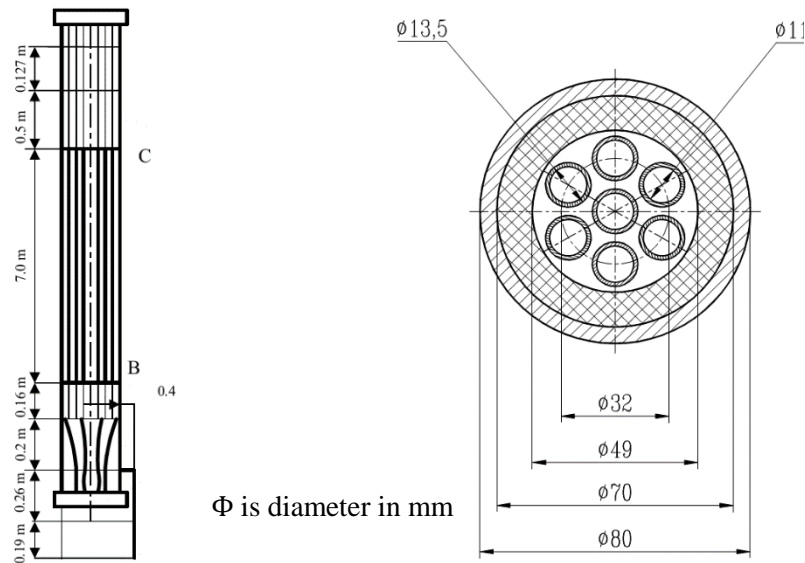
Test Section (Heat Release Zone) with vertical and cross section view [1]
